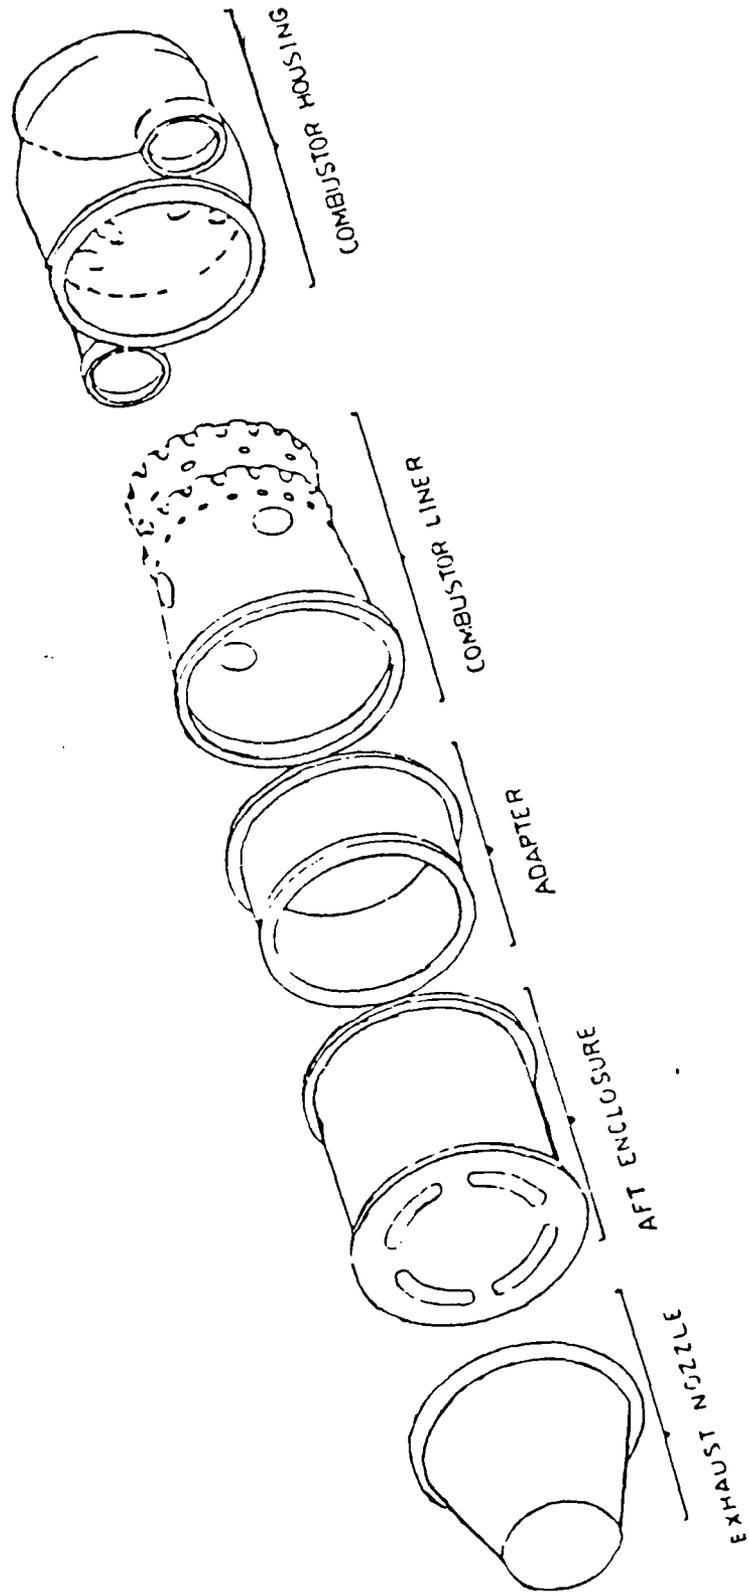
Schematic of T-63 Combustor Components [Ref. 1]
